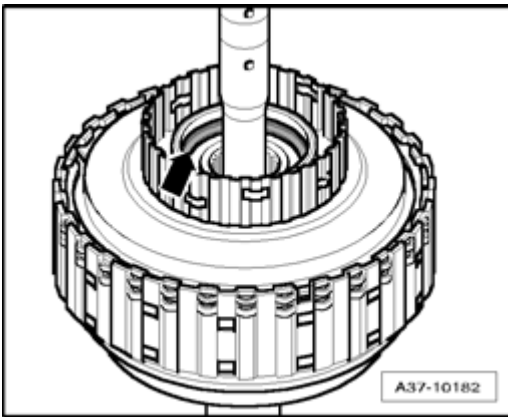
Thrust Washer For Needle Bearing Inserted In Tower "II" At Bottom
